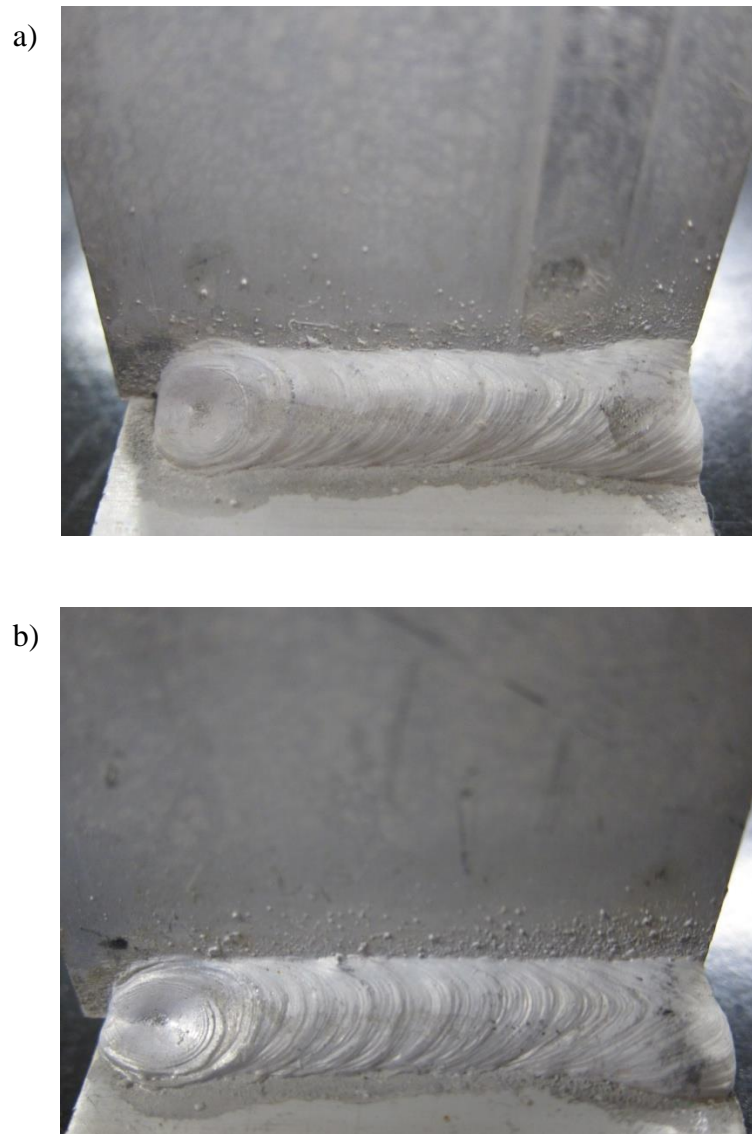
Close-up images of T-joint welded configuration F (ER5356/AA7108/L) in the (a) as-welded T6 condition and (b) as-welded T6+PB condition post exposure to GMW-14872.
